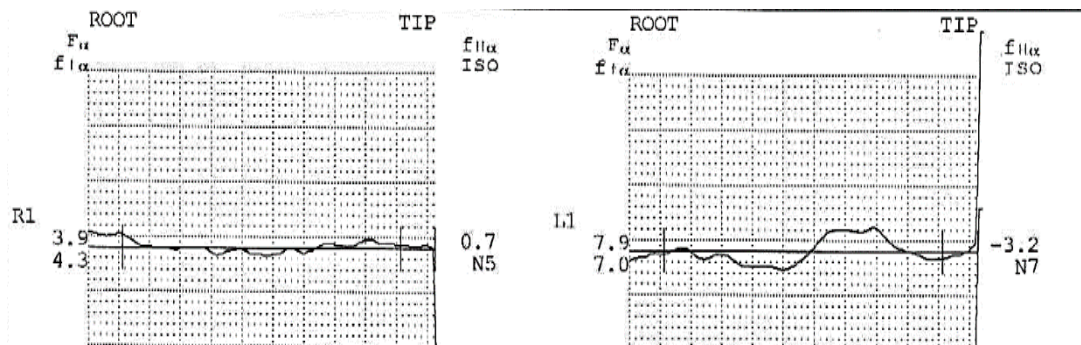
The Tooth Profile Errors of Hobbed Gear when Adjusting
